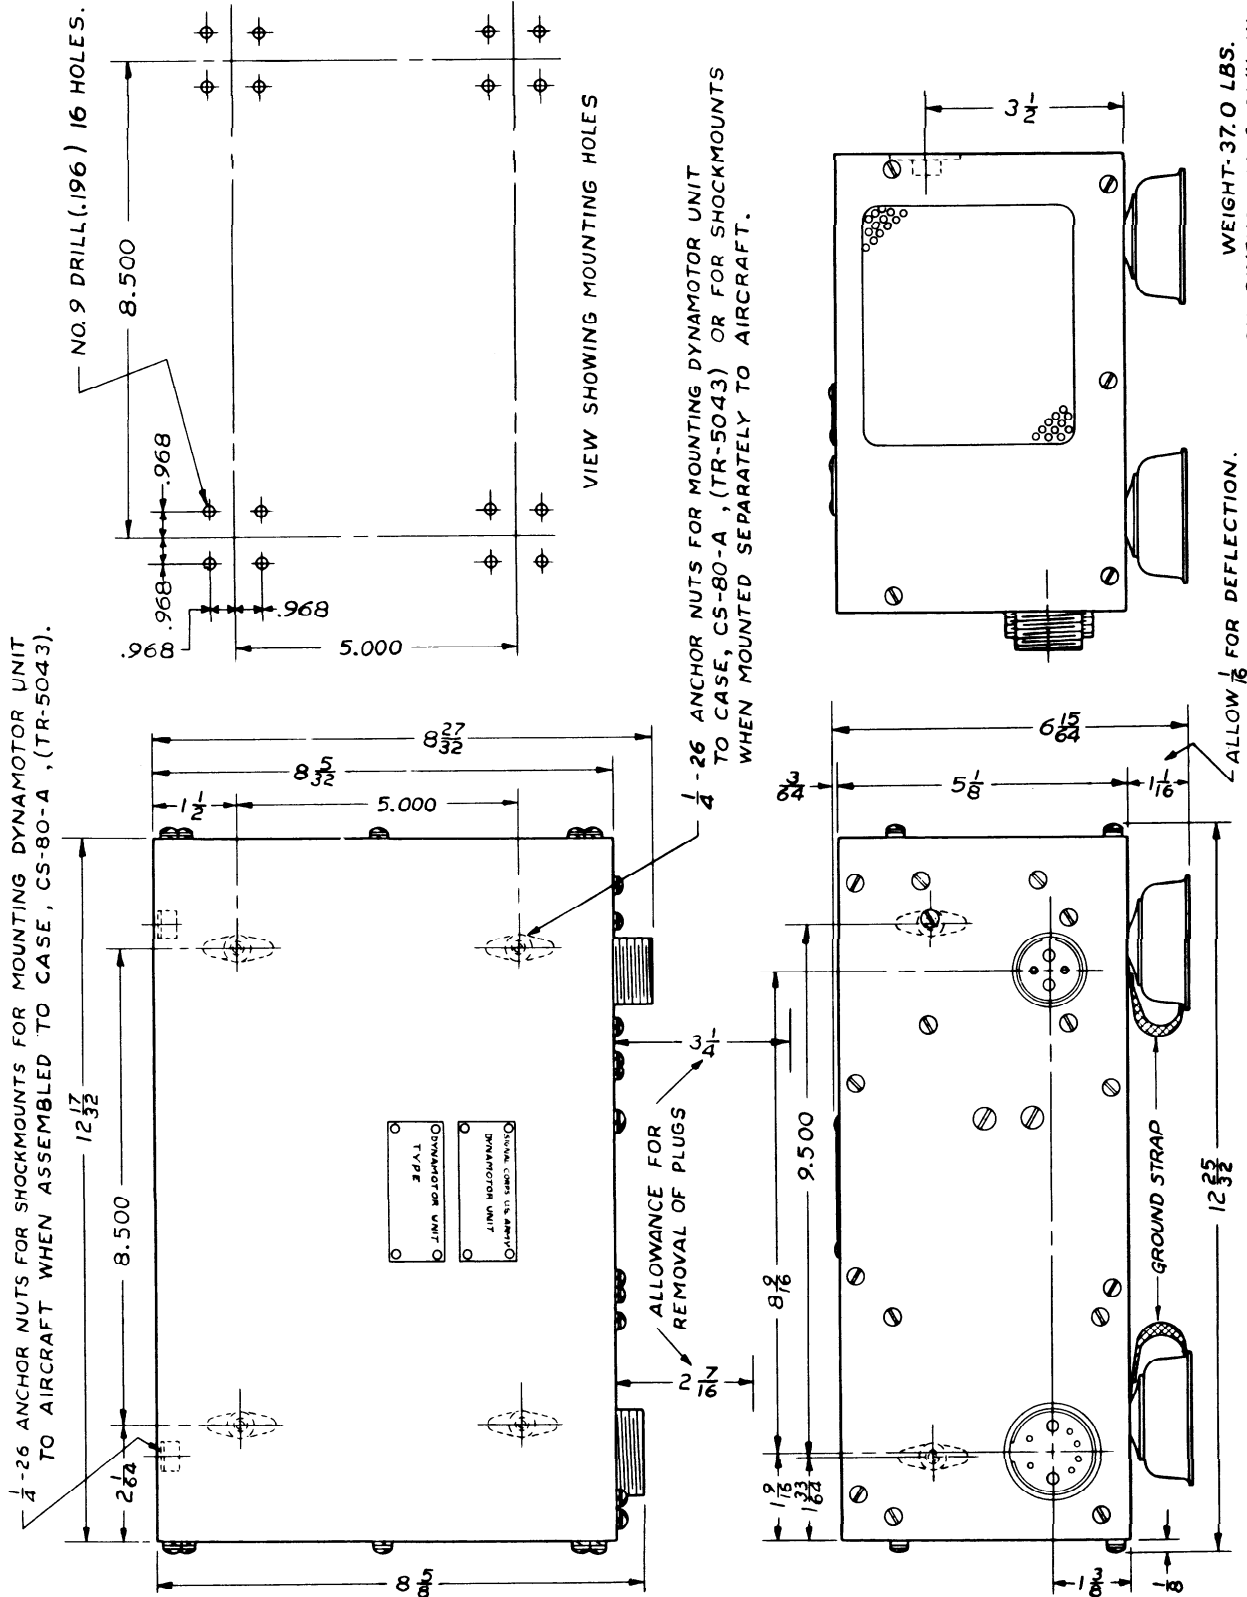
DYNAMOTOR UNIT PE-94-A OR PE-98-A, OUTLINE AND MOUNTING DIMENSIONS
